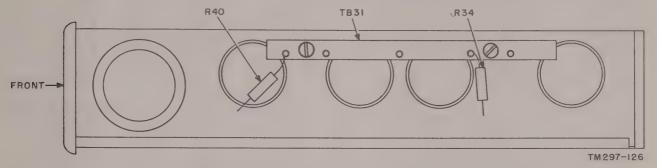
Local oscillator plug-in unit, bottom view showing alinement test points.
